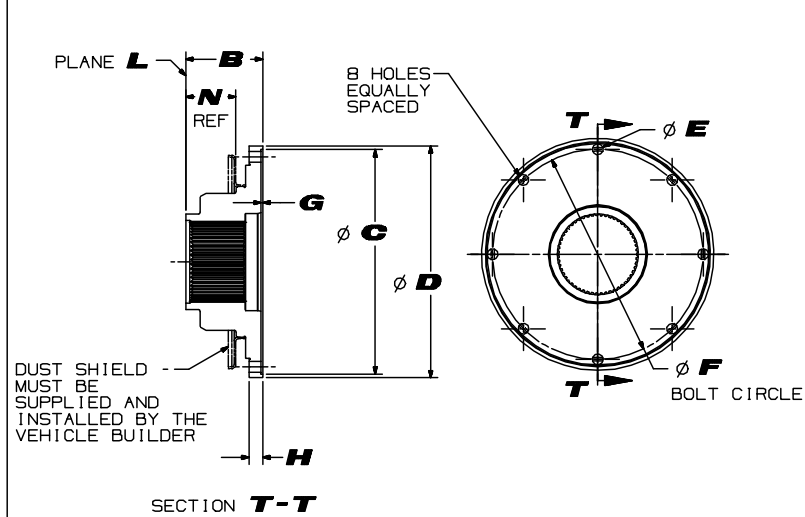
FIGURE III: COMPANION FLANGE ASSEMBLY (SPICER 1710 SERIES)
